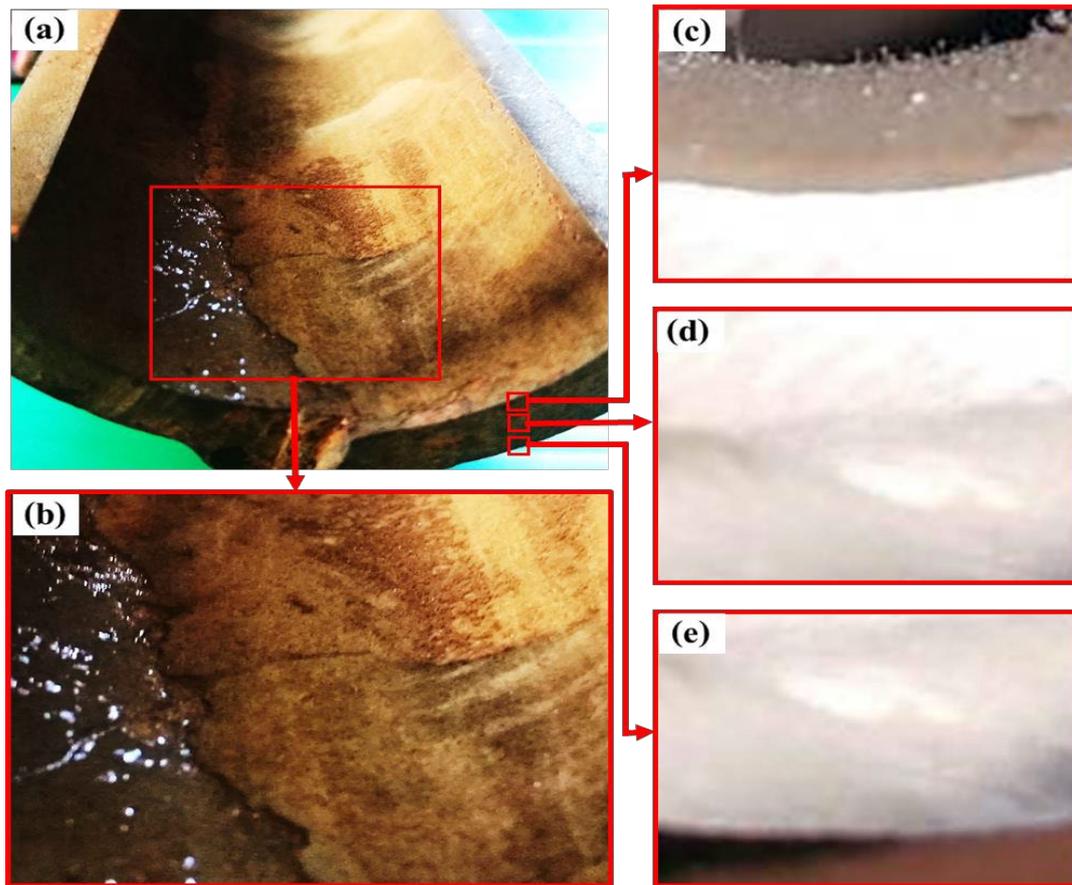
Visual inspection for inner surface conditions of the used tube (a) inner surface; (b-e) high magnification views of inner surface
